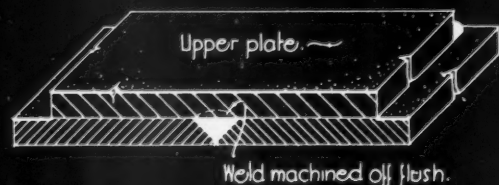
V-WELDING PLATES TO BE OVER-PLATED.
